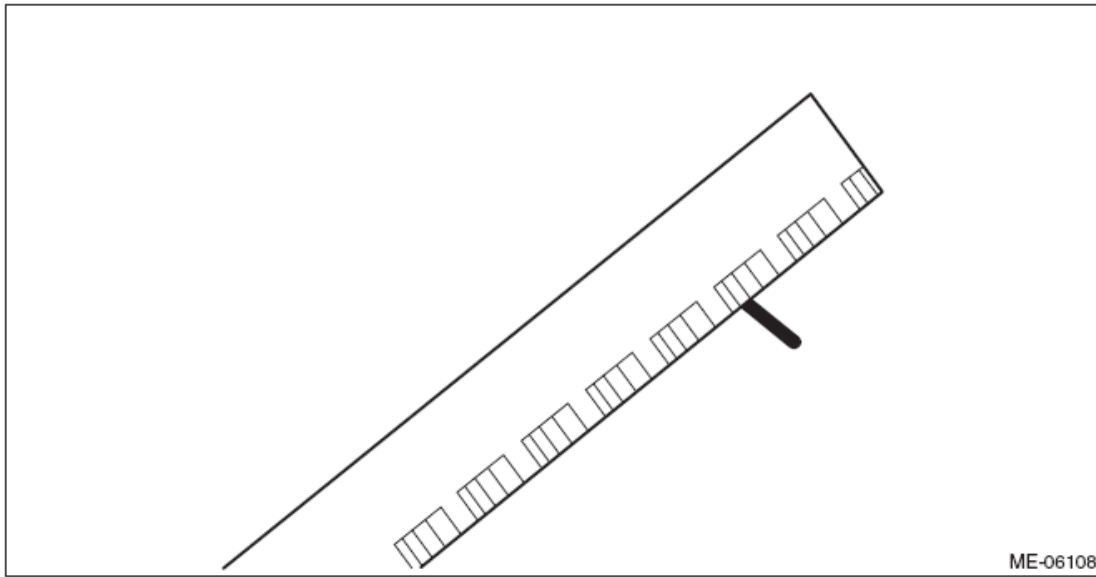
Identifying Connecting Rod Bearing Oil Clearance
